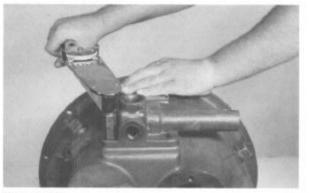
Install valve screws and lockwashers. Tighten 23 to 25 ft.lbs. torque [31,2 - 33,8 N.m.].
